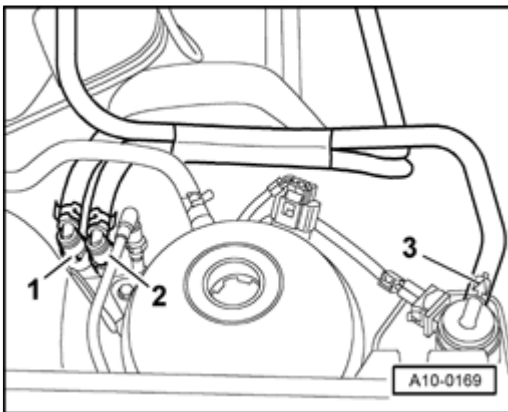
Locating Fuel Supply & Return Lines & EVAP Canister Purge Regulator Valve
